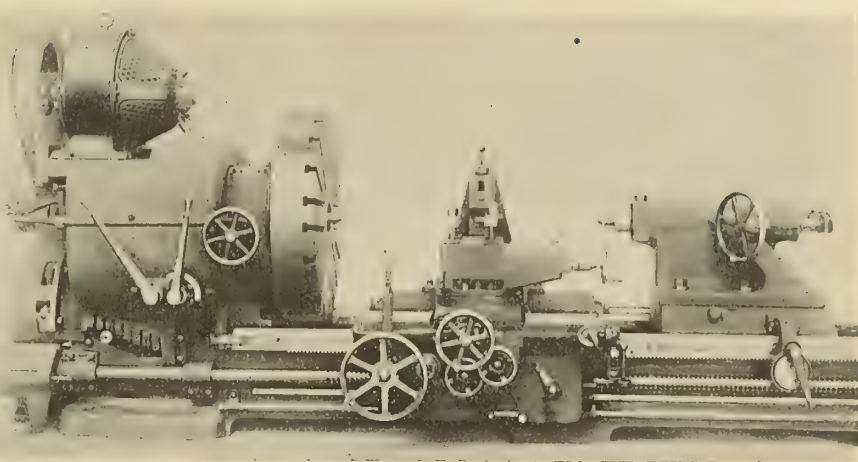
Modern Heavy Duty Lathe Especially Designed for Direct Current Motor Drive
